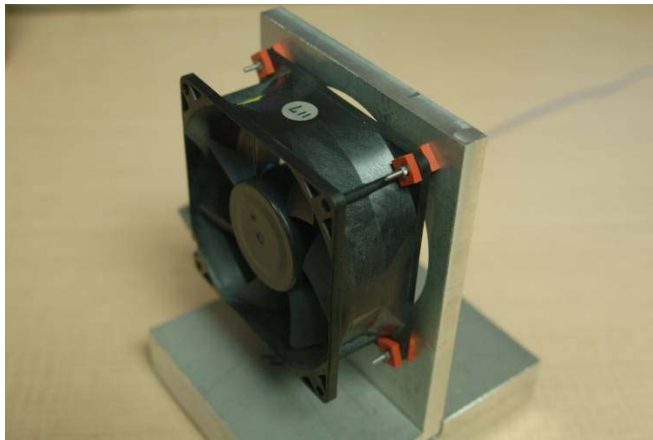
Test Fixture: A Fan is mounted on the test fixture
